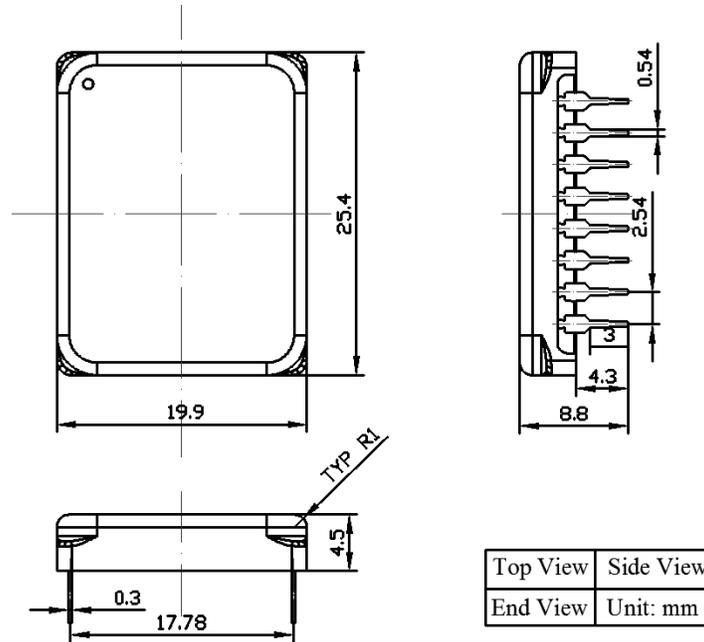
Dimensions of the DIP package controller of TECA1-xV-xV-DAH
